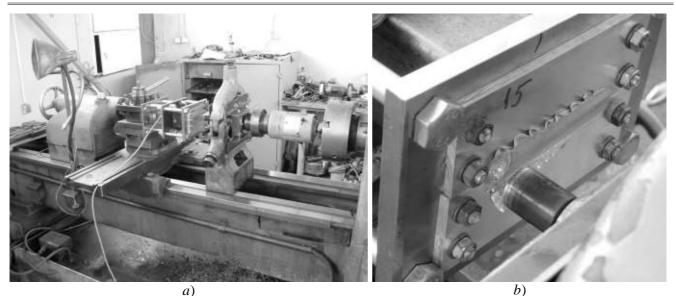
Working machine with mounted equipment for welding, measuring, welding tool and workpieces (a)
